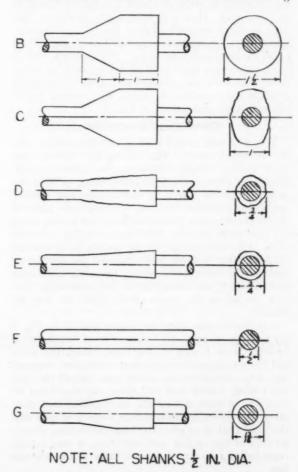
Various designs of test bars studied with the hot tear testing machine. The rippled lines on the drawing indicate casting surfaces made by hand directly in core sand without a pattern.
